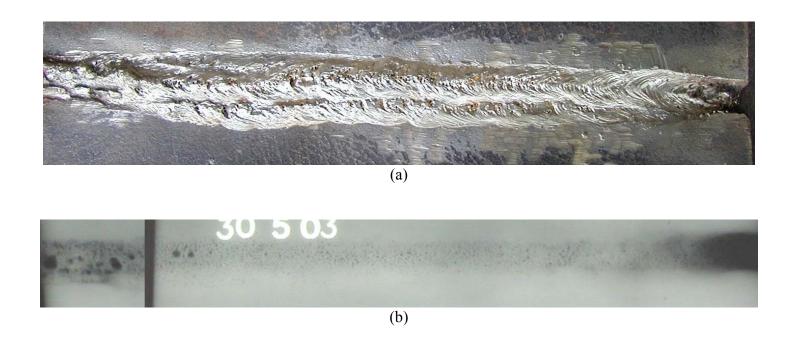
(a) V-groove wet weld deposited with E6013 electrode type on A36 steel at 100 and (b) its radiographic image.
